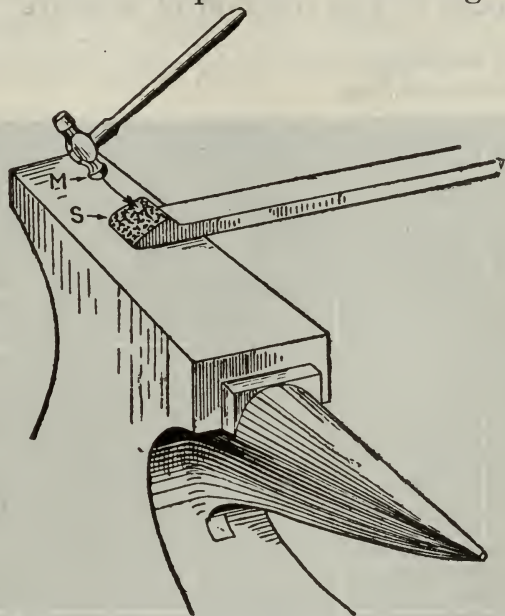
,485.—Making a scarf for a scarf weld. To do this, the upset end is thinned down, generally with the peen of the hammer, drawing it out thin at the point and crowding the metal together at the stock by drawing the hammer as shown at M. The faces to be welded should be rounded as shown at S, so that the pieces first come in contact at the center, in order to give the slag and impurities an opportunity to squeeze out as the weld is being closed.
